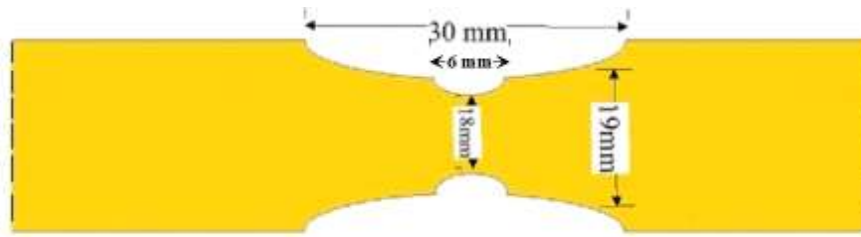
Reduced area of the fatigue sample with an extra groove machined in the middle for laser cladding
